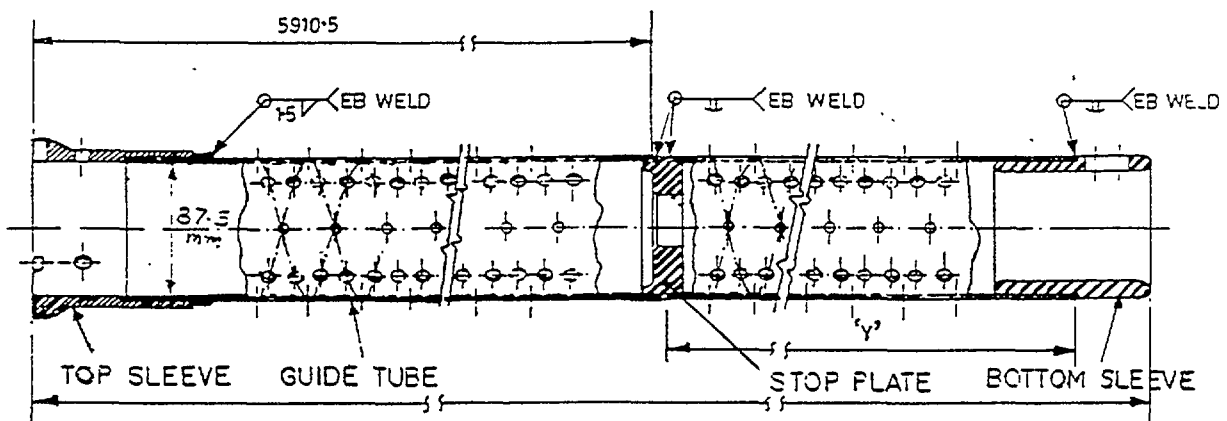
Zircaloy-2 guide tube assembly for PHWR
